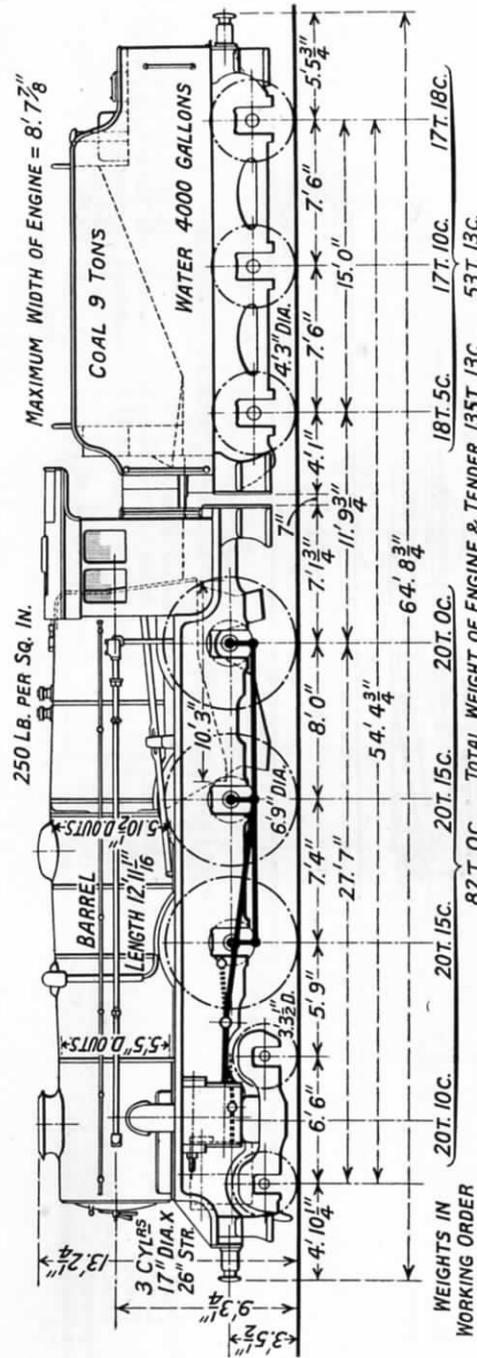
"5XP" CLASS 4-6-0 LOCOMOTIVE, L.M.S.R., WITH ENLARGED BOILER AND DOUBLE CHIMNEY.
